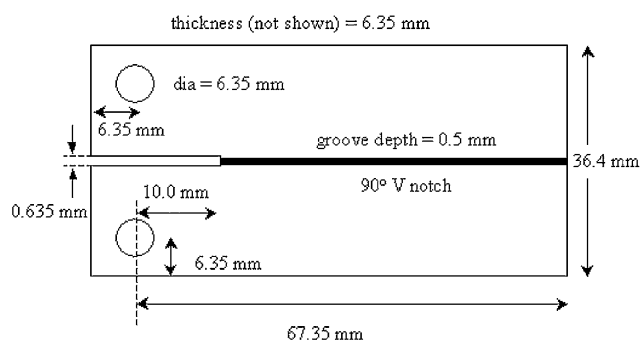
Geometry of double-cantilever beam specimen for J -integral measurement.
